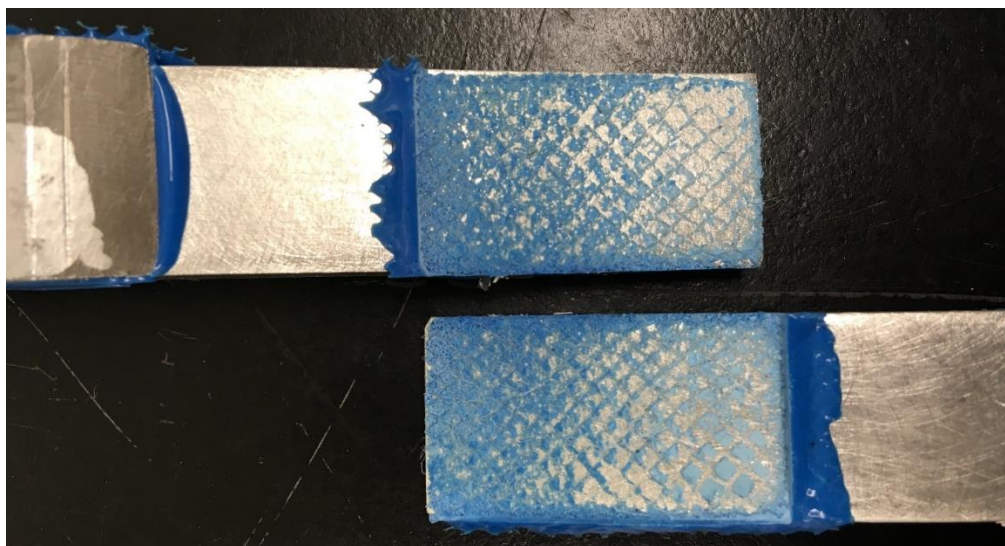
SLJ-Sample 10-Fracture Surface
